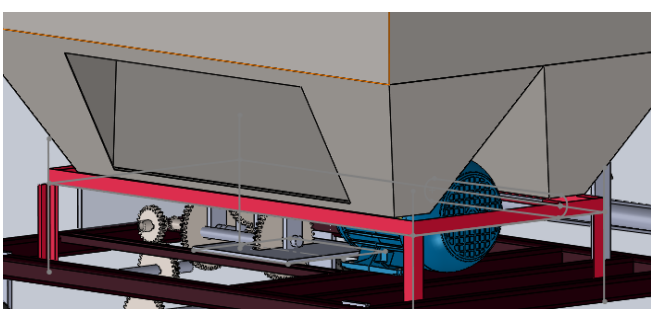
Gear mechanism to rotate thrower and conveyor using output rpm from reduction assembly.
